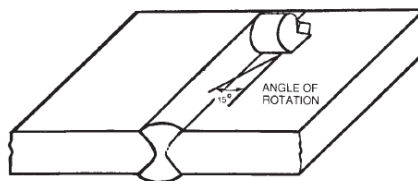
Supplementary Technique 3, for Examining Butt Welds for Suspected Cross-Cracking when the Weld Bead is not Ground Flush
